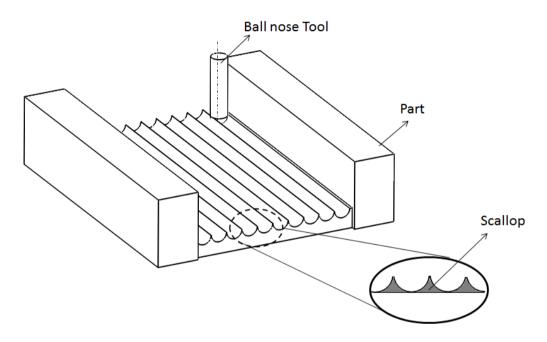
Scallop heights in machining a slot using ball nose cutter
